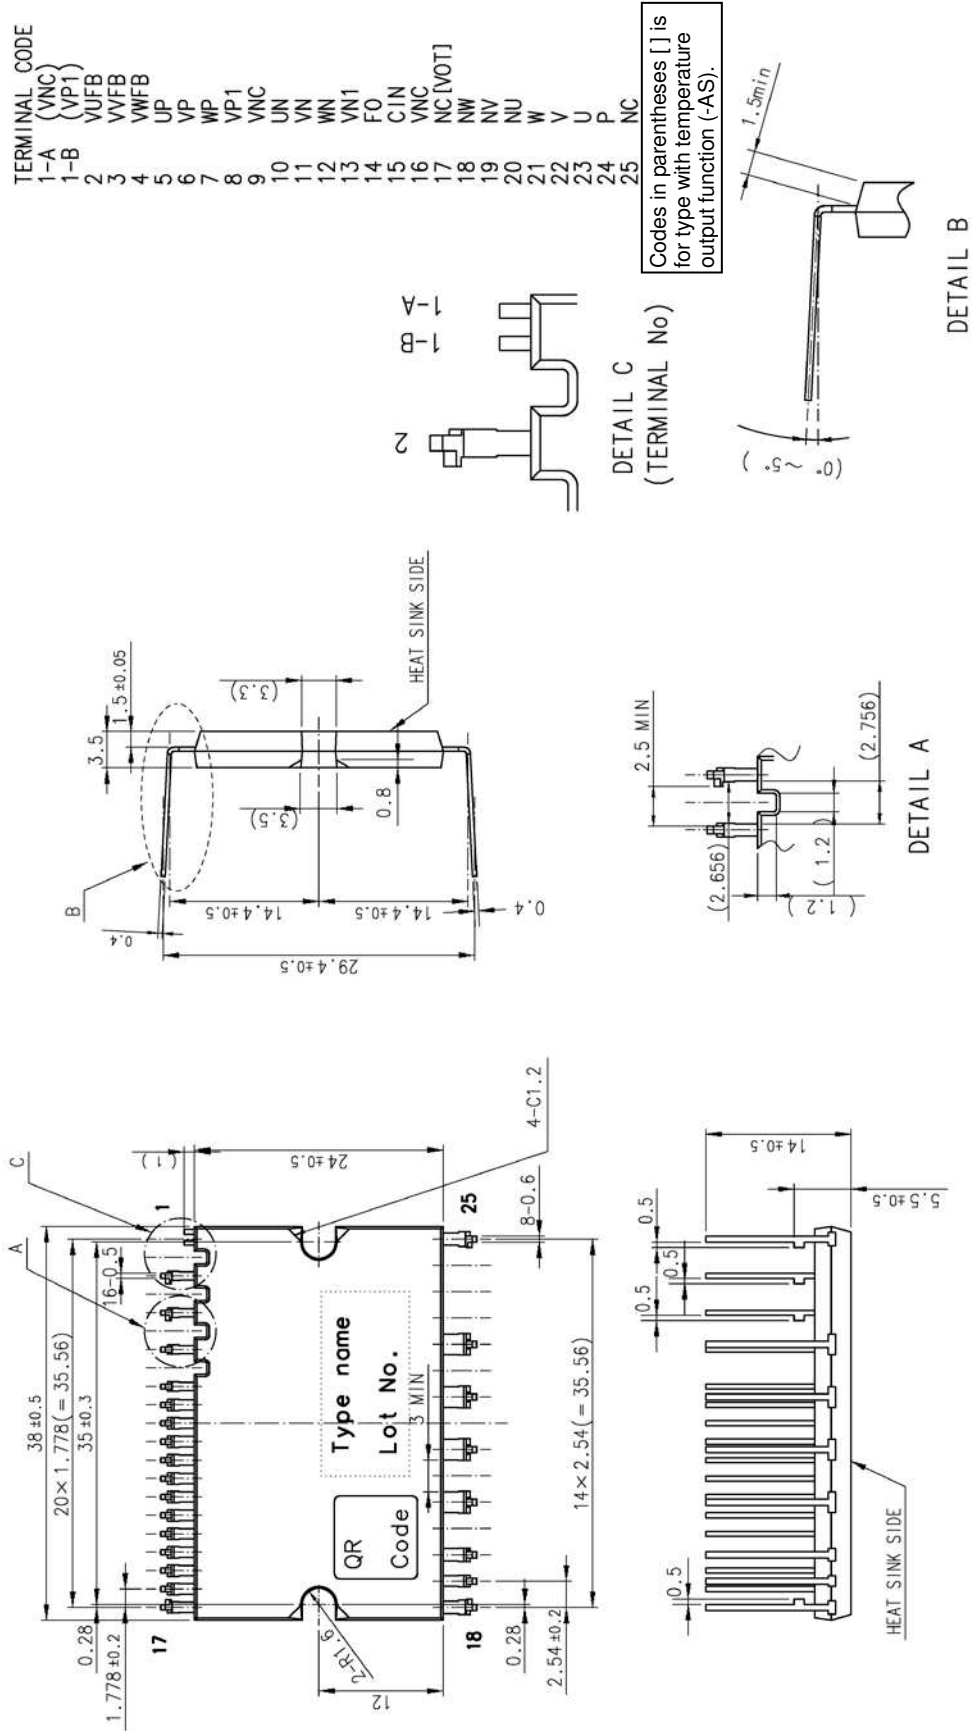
Long pin type package(-AS/-AST) outline drawing
